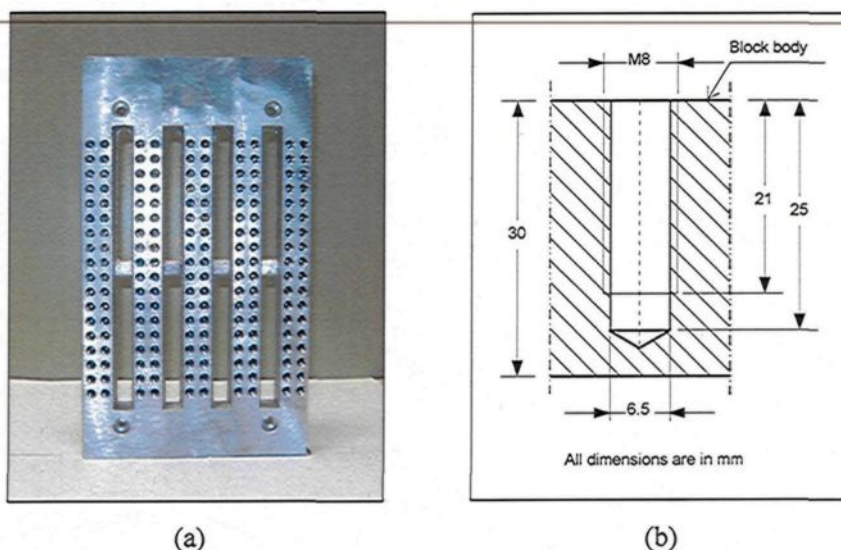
(a) Machinability test block after drilling and tapping; (b) dimensions of the resulting holes.
